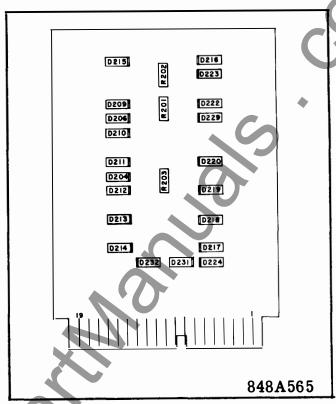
Component Location on AND Printed Circuit Board for Type SKBU Relay.
